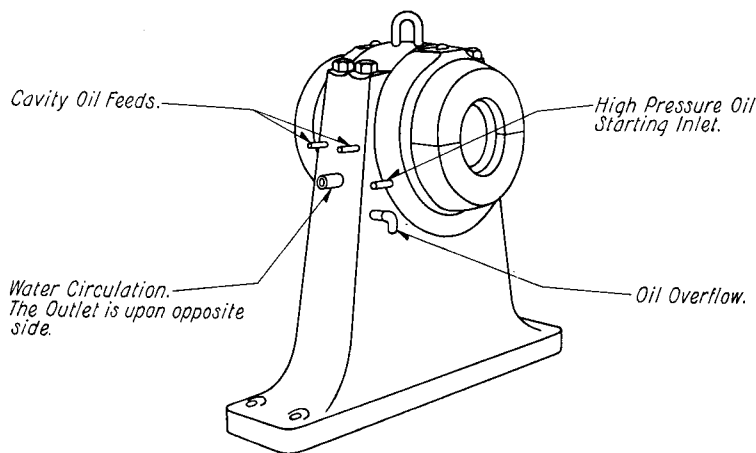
Bearing Pedestal Showing Position of Oil and Water Piping
